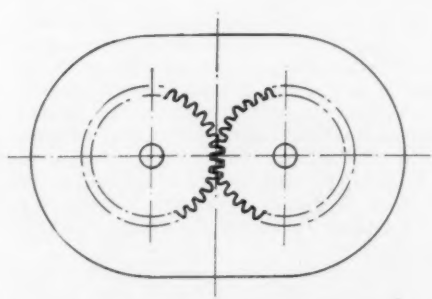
End view of positive-displacement compressor showing gearing of the impellers
